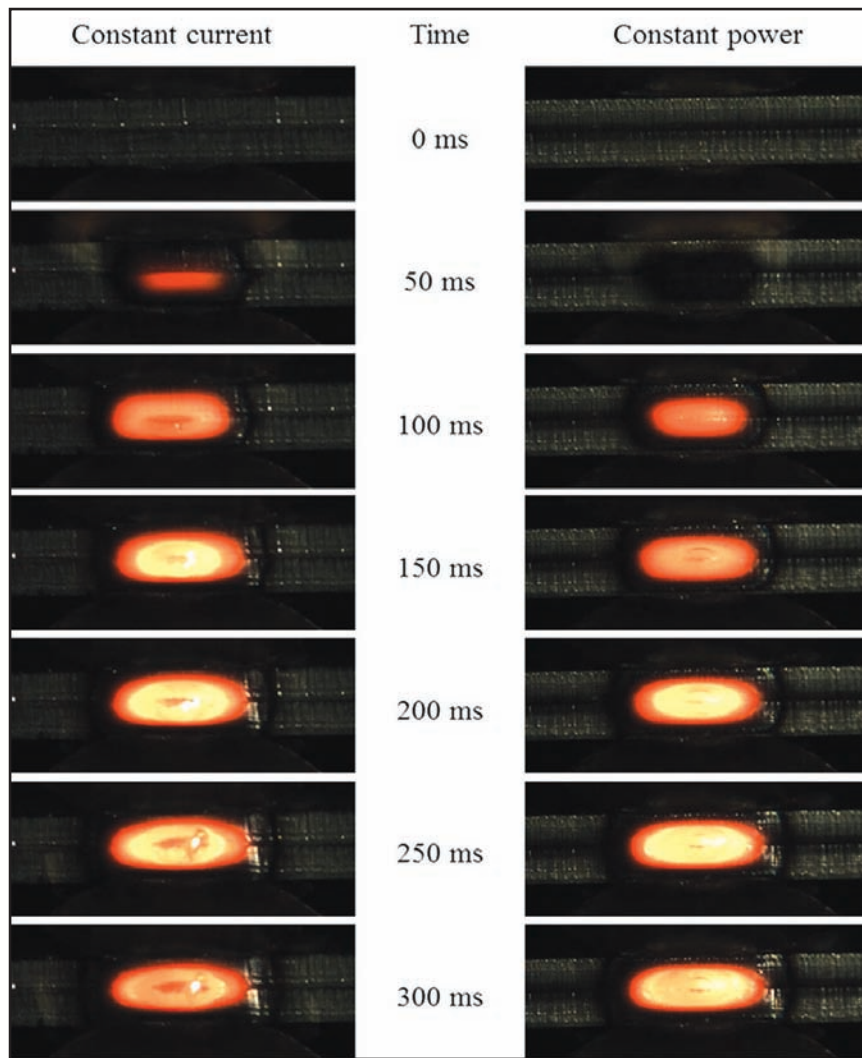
Nugget growth images for CCC and CPC welding.
